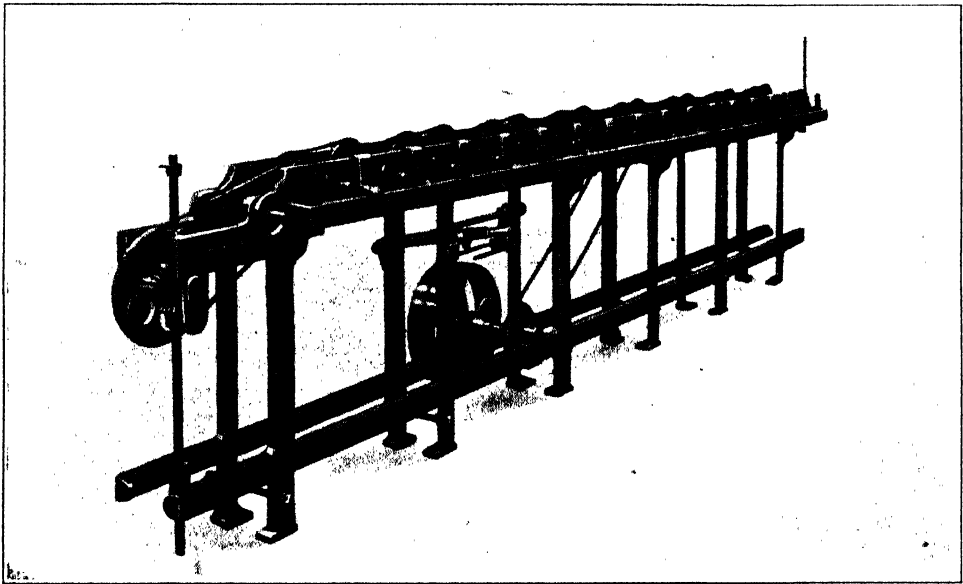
CHAIN-DRIVEN CONTINUOUS WIRE-DRAWING MACHINE—G. HATTERSLEY.
